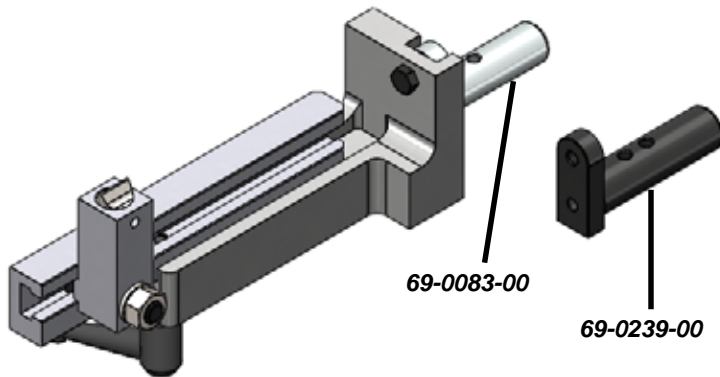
The O.D. tracking slide trip assembly (69-4744-01) includes two trip positioning bars.
